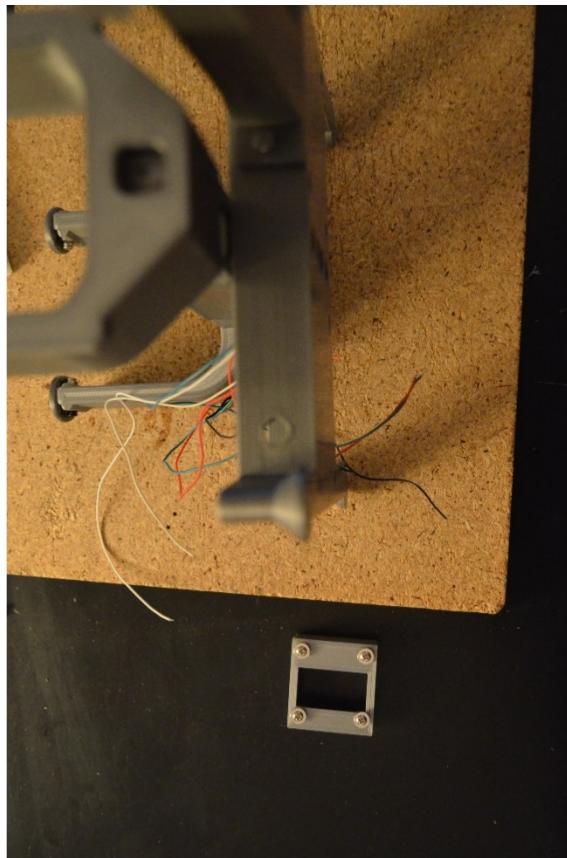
Step 4 – Use a Dremel with a 6 mm drill bit to open the the toggle switch hole.
